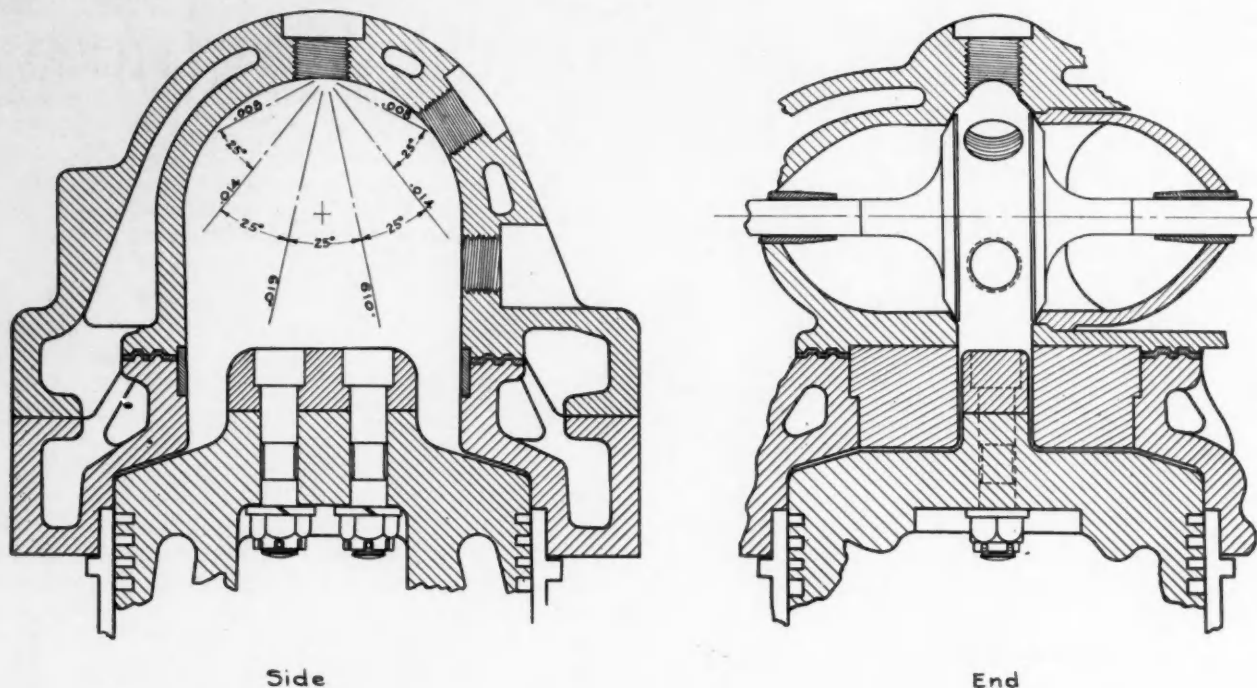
Combustion-Chamber and Fuel-Spray Arrangement
